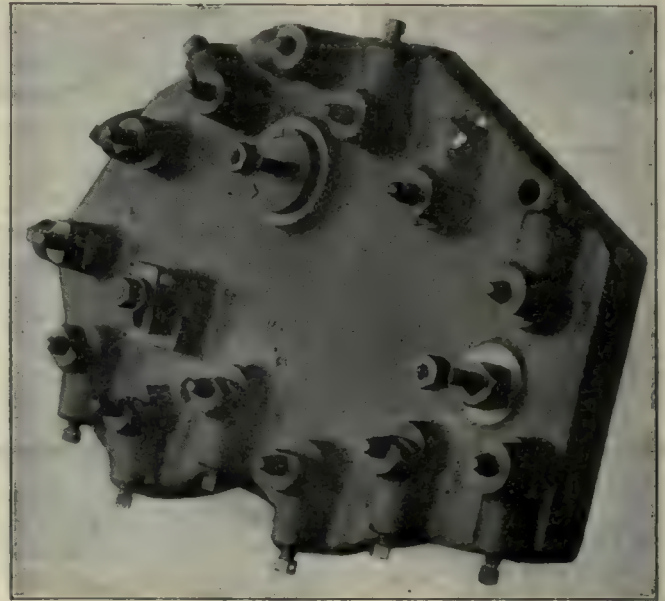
MILLING FIXTURE USED FOR MILLING CRANK-CASE GEAR COVER
